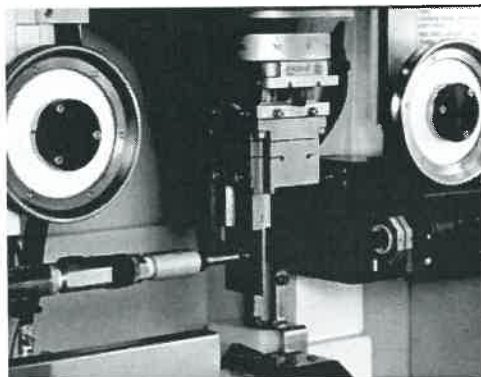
An automatic threading nozzle which carries a wire electrode and a suction nozzle are brought close to both sides of the work-piece.
